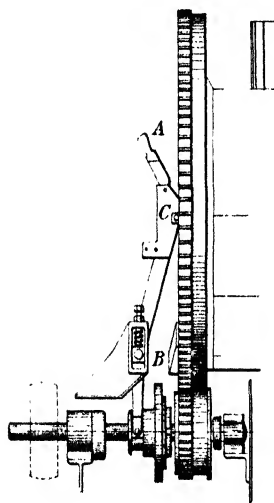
Mechanism of gear-driven tippler. End elevation.
